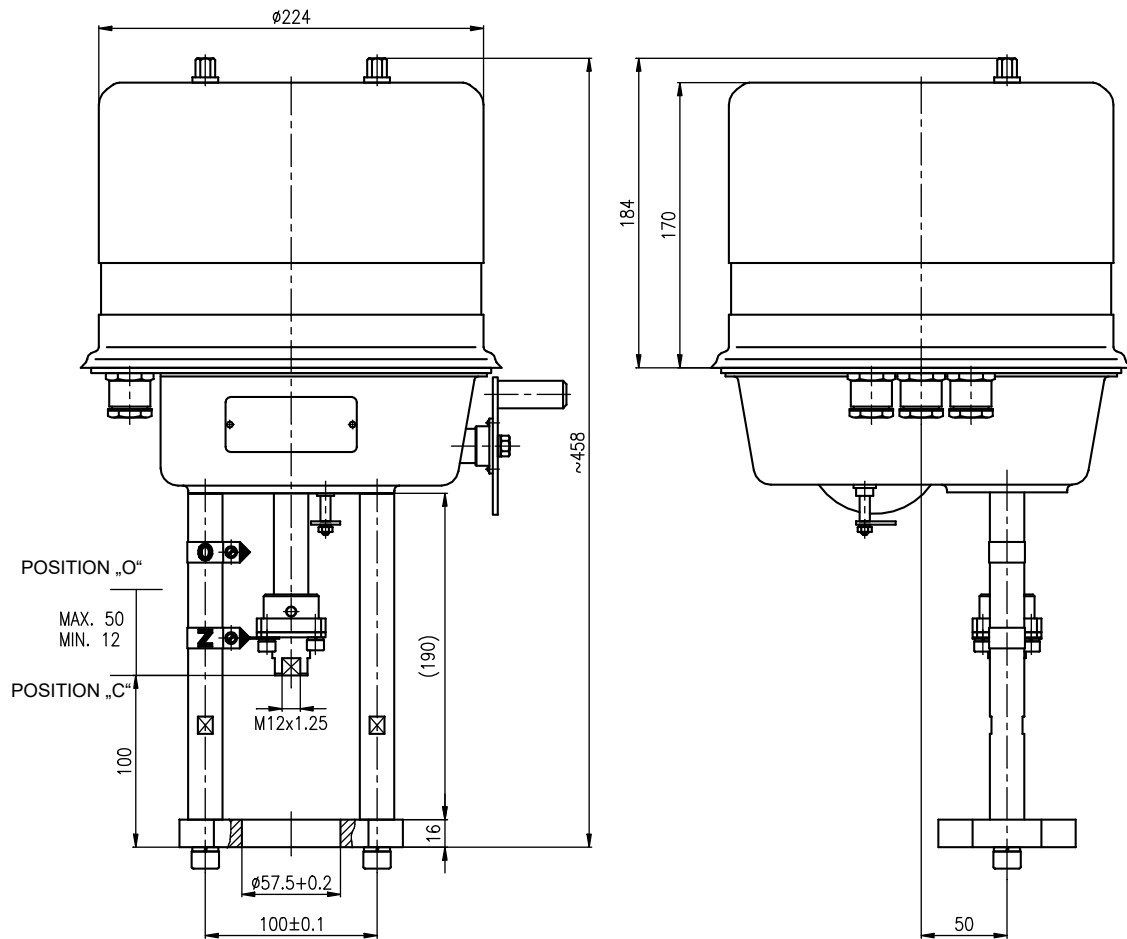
DIMENSIONAL DRAWING - CONNECTION P9
